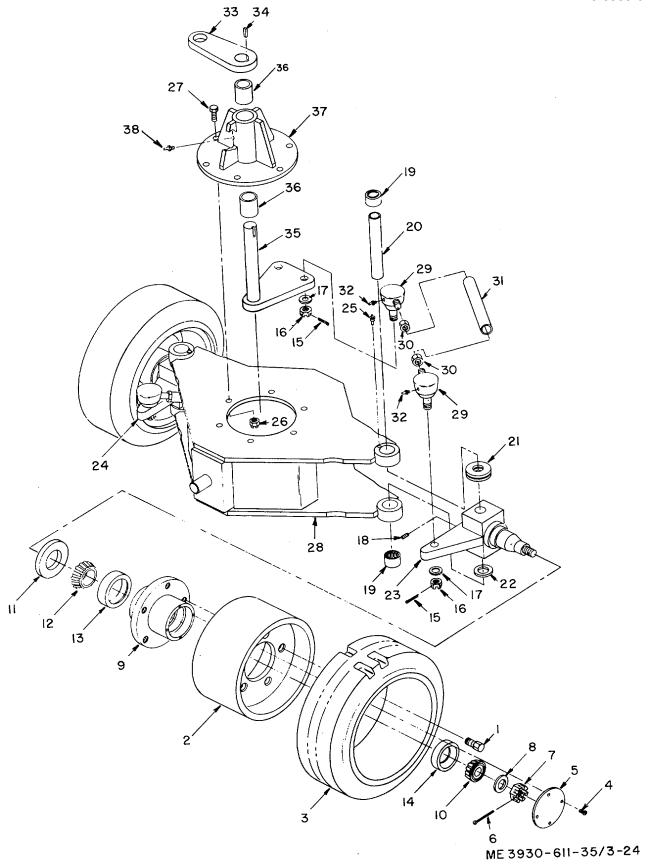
Steering axle assembly, disassembly and reassembly.
